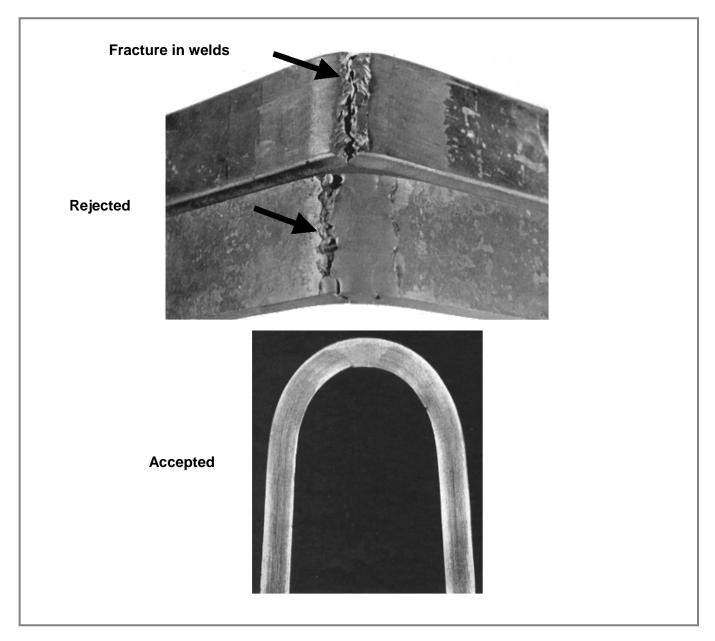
Fracture in welds caused by weld imperfections (Bend test results of weld joints)
